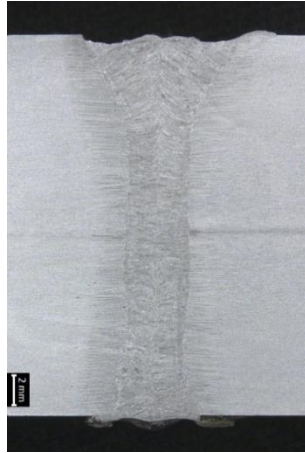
Plate thickness 25 mm; backing support; beam power 50 kW; welding travel speed 1 m/min;
